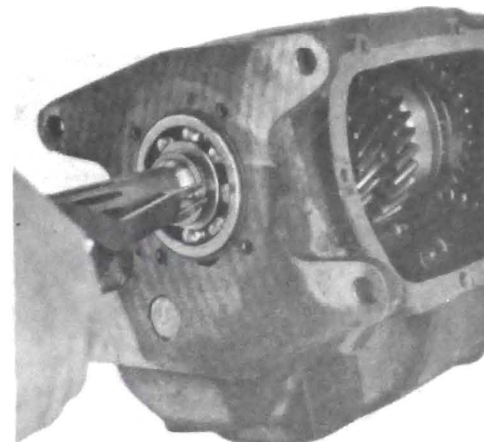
Removing Main Drive Gear Bearing Retainer Bolts
